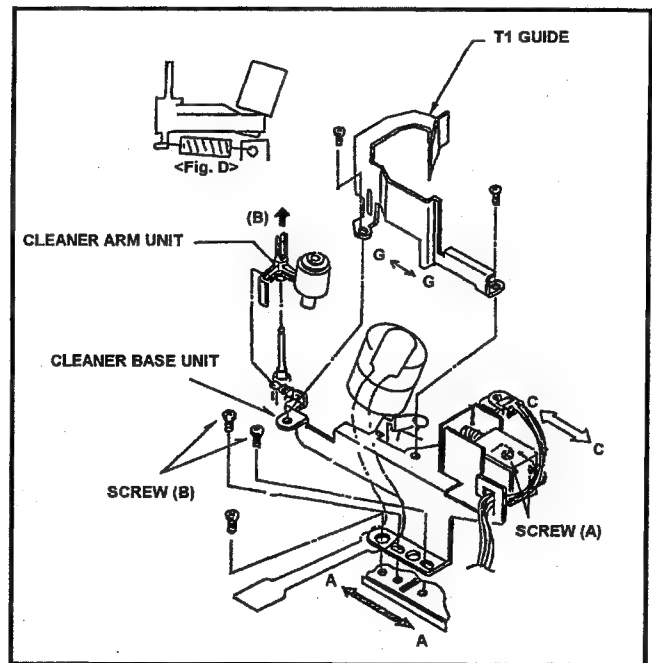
Cleaner Solenoid Position Adjustment
